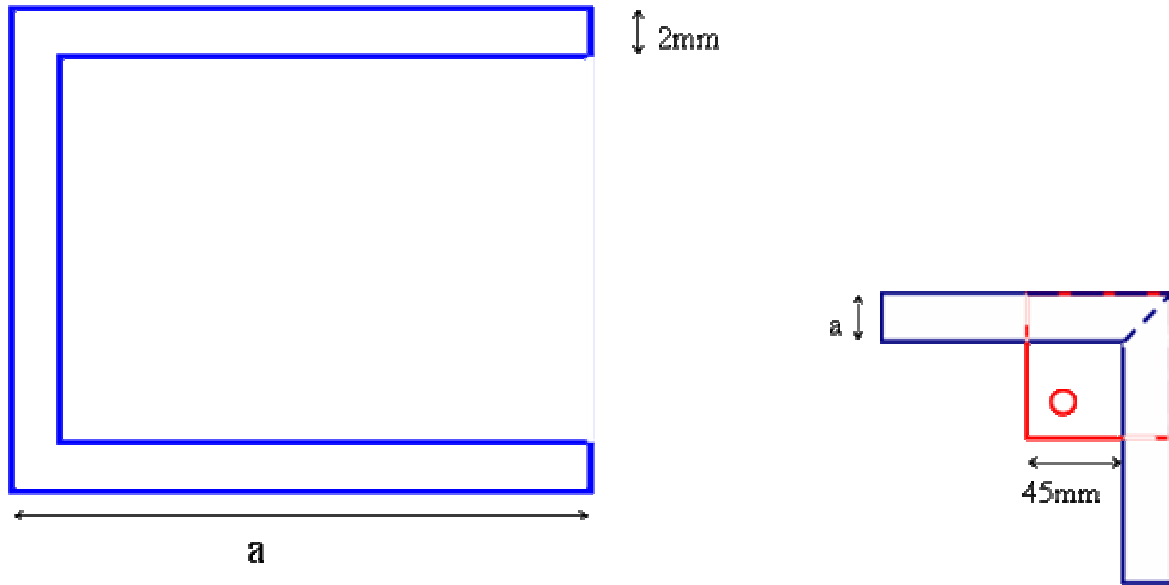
(left) The U section of the frame constituting the supporting structure. The length a of each side is 25mm for the lower coil, and is 35mm for the upper coil. (Right) Zoom of a corner of the supporting structure. An aluminium layer has been welded with an hole at the inner corner. Each holes of the upper coil corresponds to a given hole of the lower coil.
